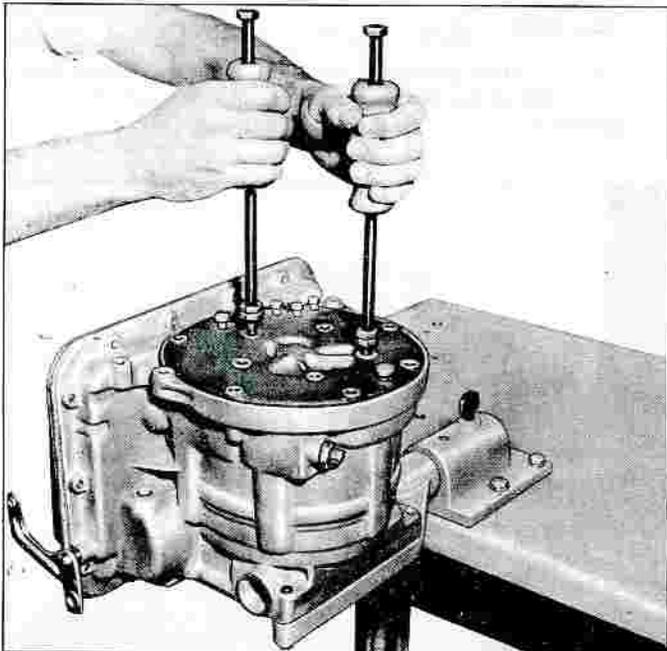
E-19—Removing Front Pump with Slide Hammers J-6585 and Adapters J-6585-3
